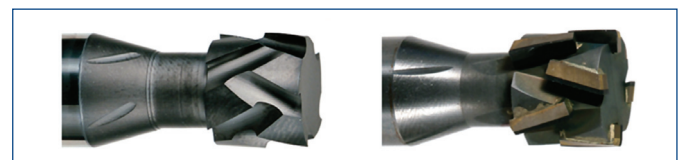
New developed cutting tools DEMO1 (left), DEMO2 (right).
